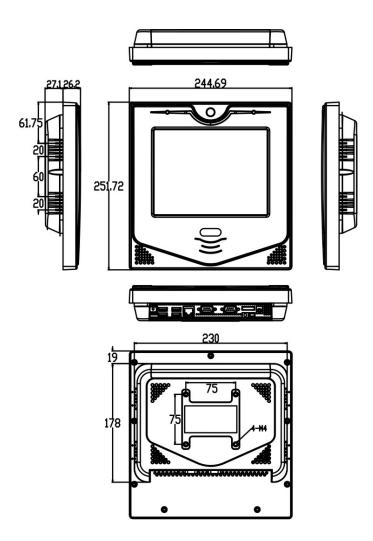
ACT-08A-ATOM Dimensions (mm)
